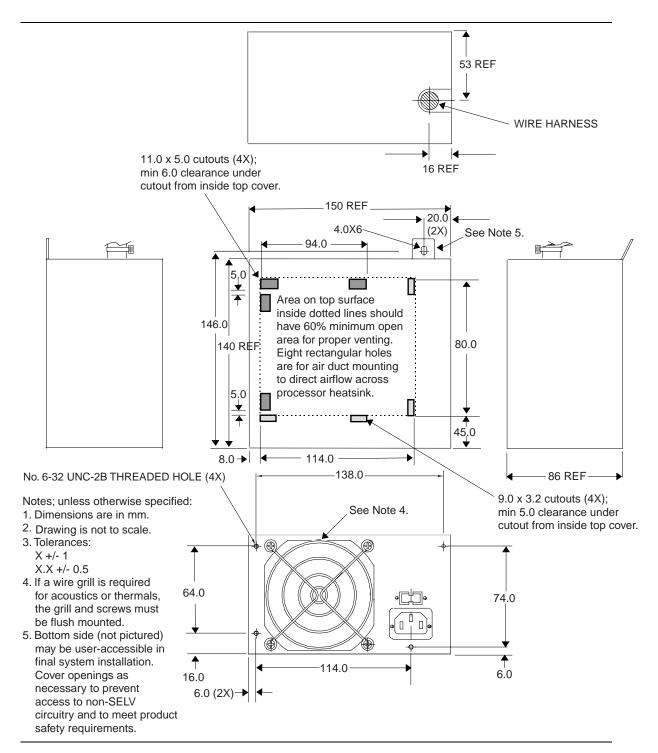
Power Supply Dimensions for Chassis in Which the P/S Cools the Processor
